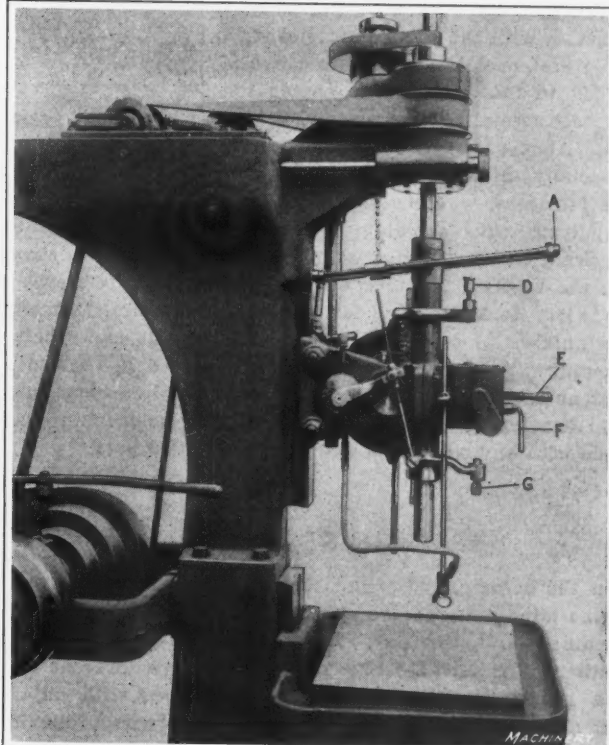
Opposite Side of the "Avey" Automatic Drilling Machine illustrated in Fig. 1
